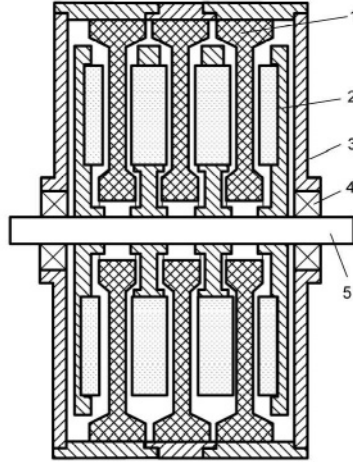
Coreless multidisc AFPM machine with three coreless stators and four PM rotor units: 1 — stator winding, 2 — rotor unit, 4 — PM, 3 — frame, 4 — bearing, 5 — shaft.
